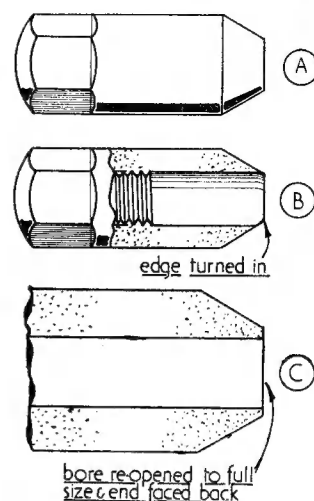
"A"—a barrel wheel-nut; "B" the contracted bore; "C"—the remachined nut
